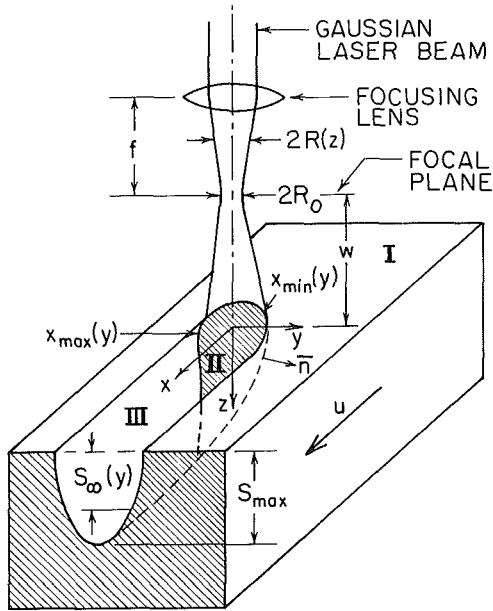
Cross-sectional view of laser evaporation setup and regimes
